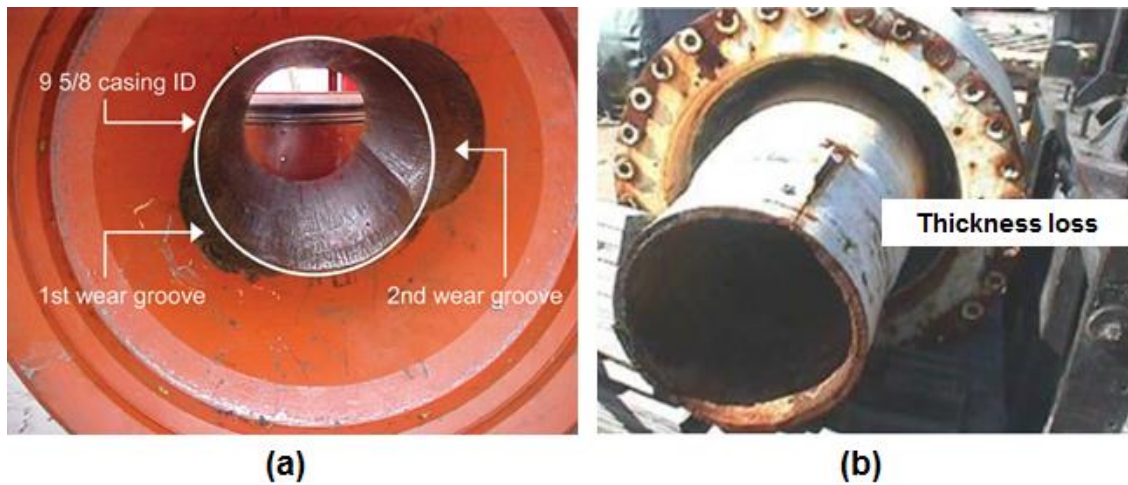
(a) Wear grooves caused by the contact of rotating tool joints in the inner wall of a casing. (b) Drilling riser failed by thickness loss caused by wear and corrosion.
